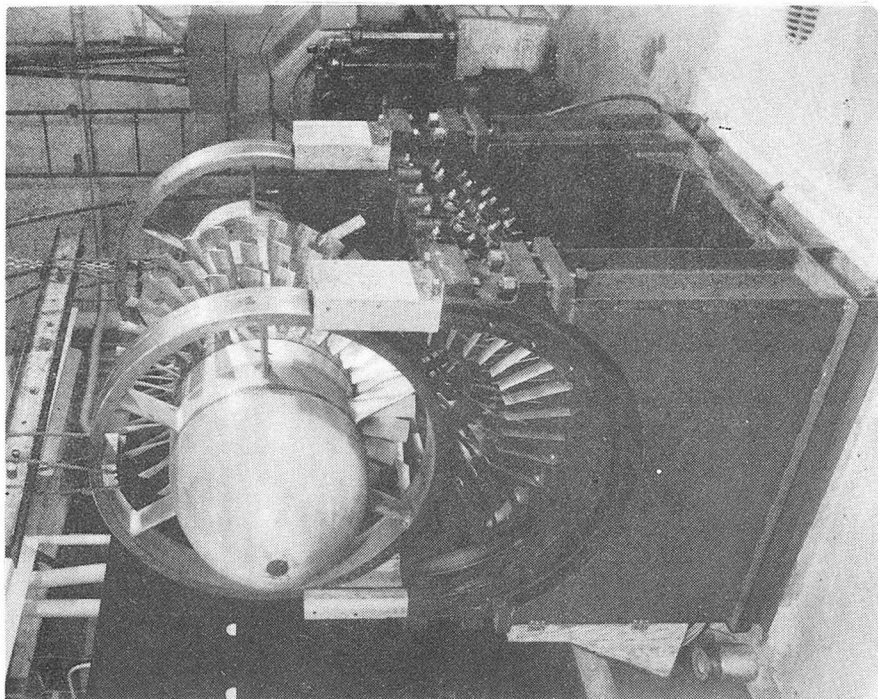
ROTOR ASSEMBLY BEING PLACED IN CASE
